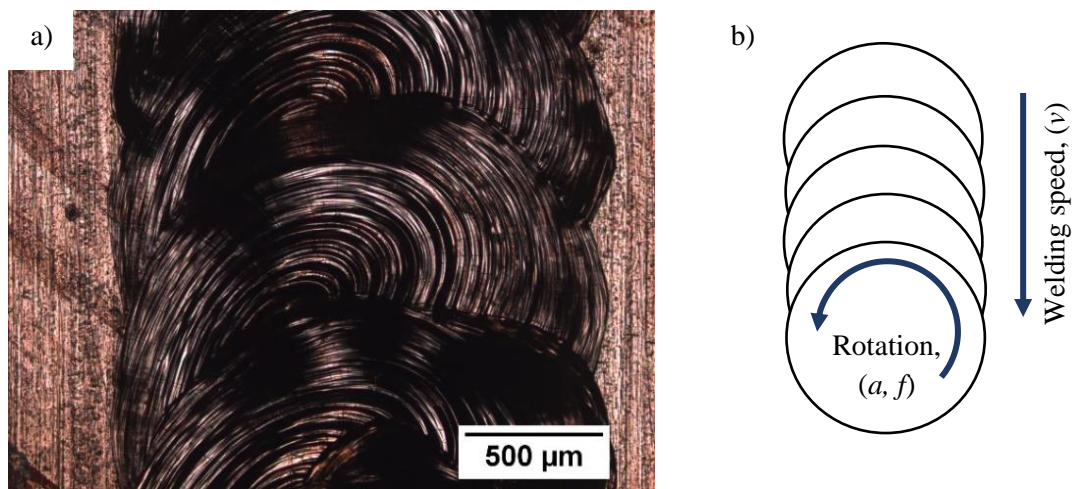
20 – Weld bead surface a) of sample 6D (laser power = 4000 W, welding speed = 4 m/min, focal point position = 0, rotation amplitude = 1.2 mm, rotation frequency = 100 Hz, beam trajectory = circular) and its b) vectorial scheme.
